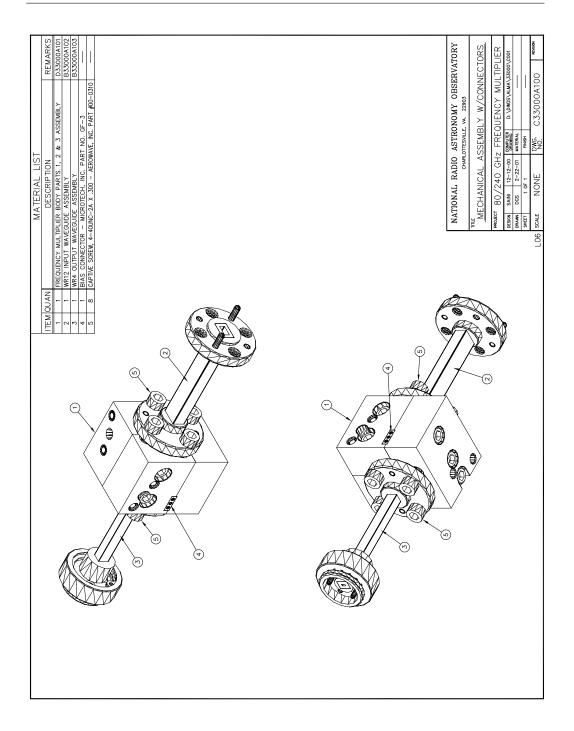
80/240 GHz frequency tripler, version 1: Mechanical assembly of the three piece block showing the DC bias connector and the waveguide flange adapters.
